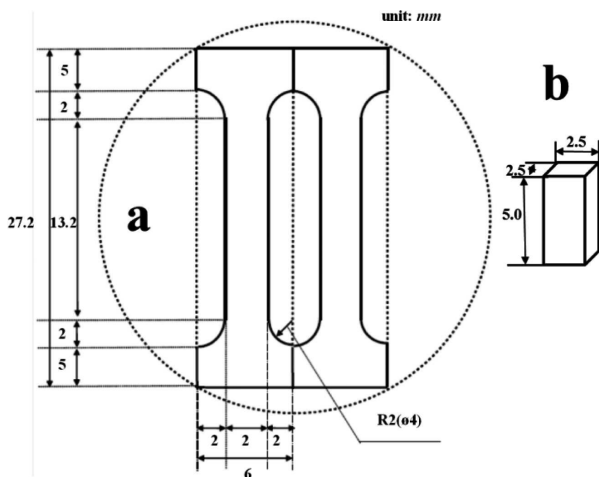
Schematic illustration of the specimen types in tensile-test (a) and compressive-test (b)
